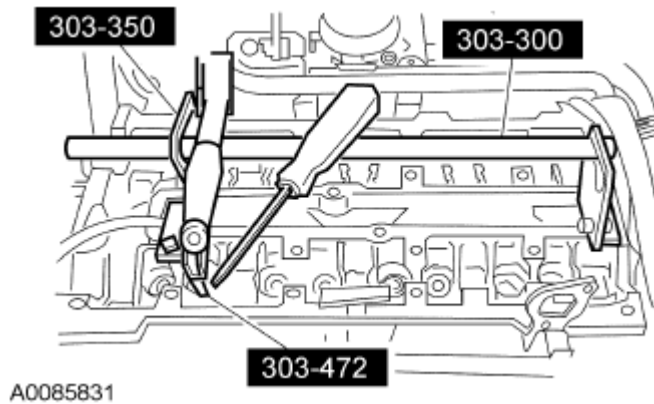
Removing Valve Spring Retainer And Valve Spring
